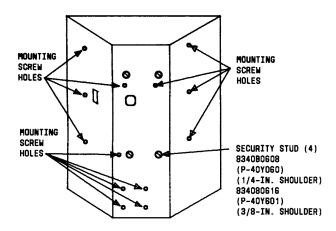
Location of Mounting Screw Holes and Security Studs In 2D-Type Set
